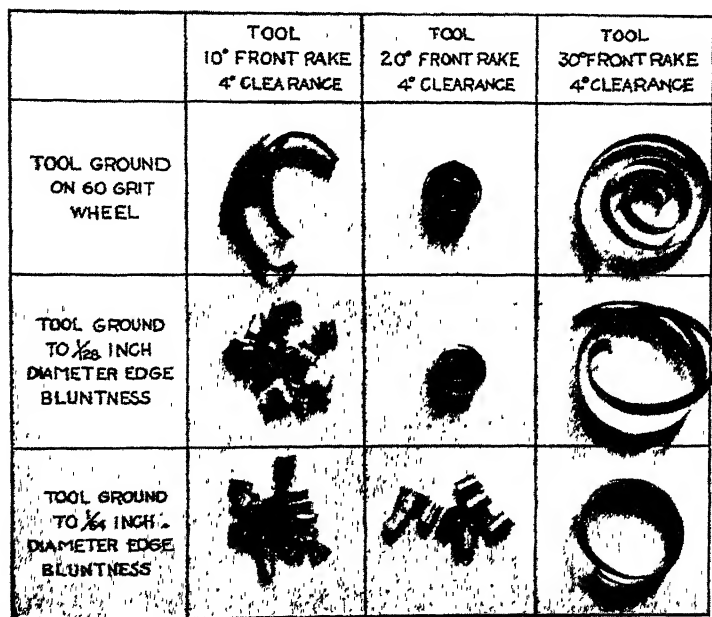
TOOL SHARPNESS—FRONT RAKE, STEEL CHIPS
